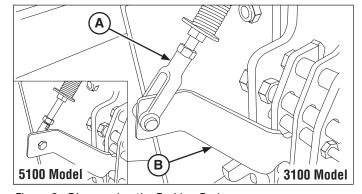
Disengaging the Parking Brake A. Adjustment Link
